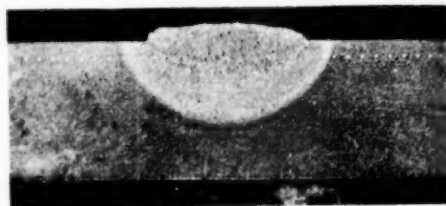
Method of Making Hardness Survey on Single Bead Weld.
